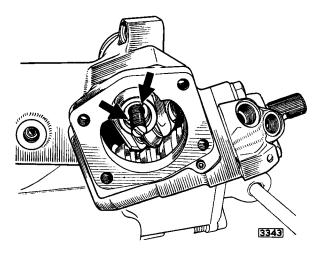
Positioning the roller towards the middle of the cam. The arrows indicate the adjustment slots in the top of the sector shaft.
